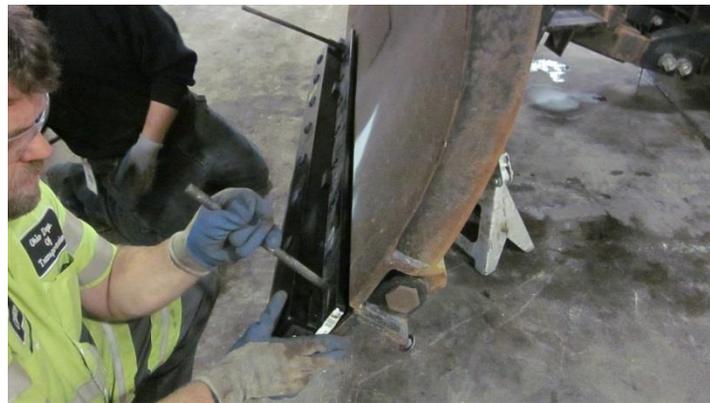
Installing a New Blade on Aligned Mounting Pins.
